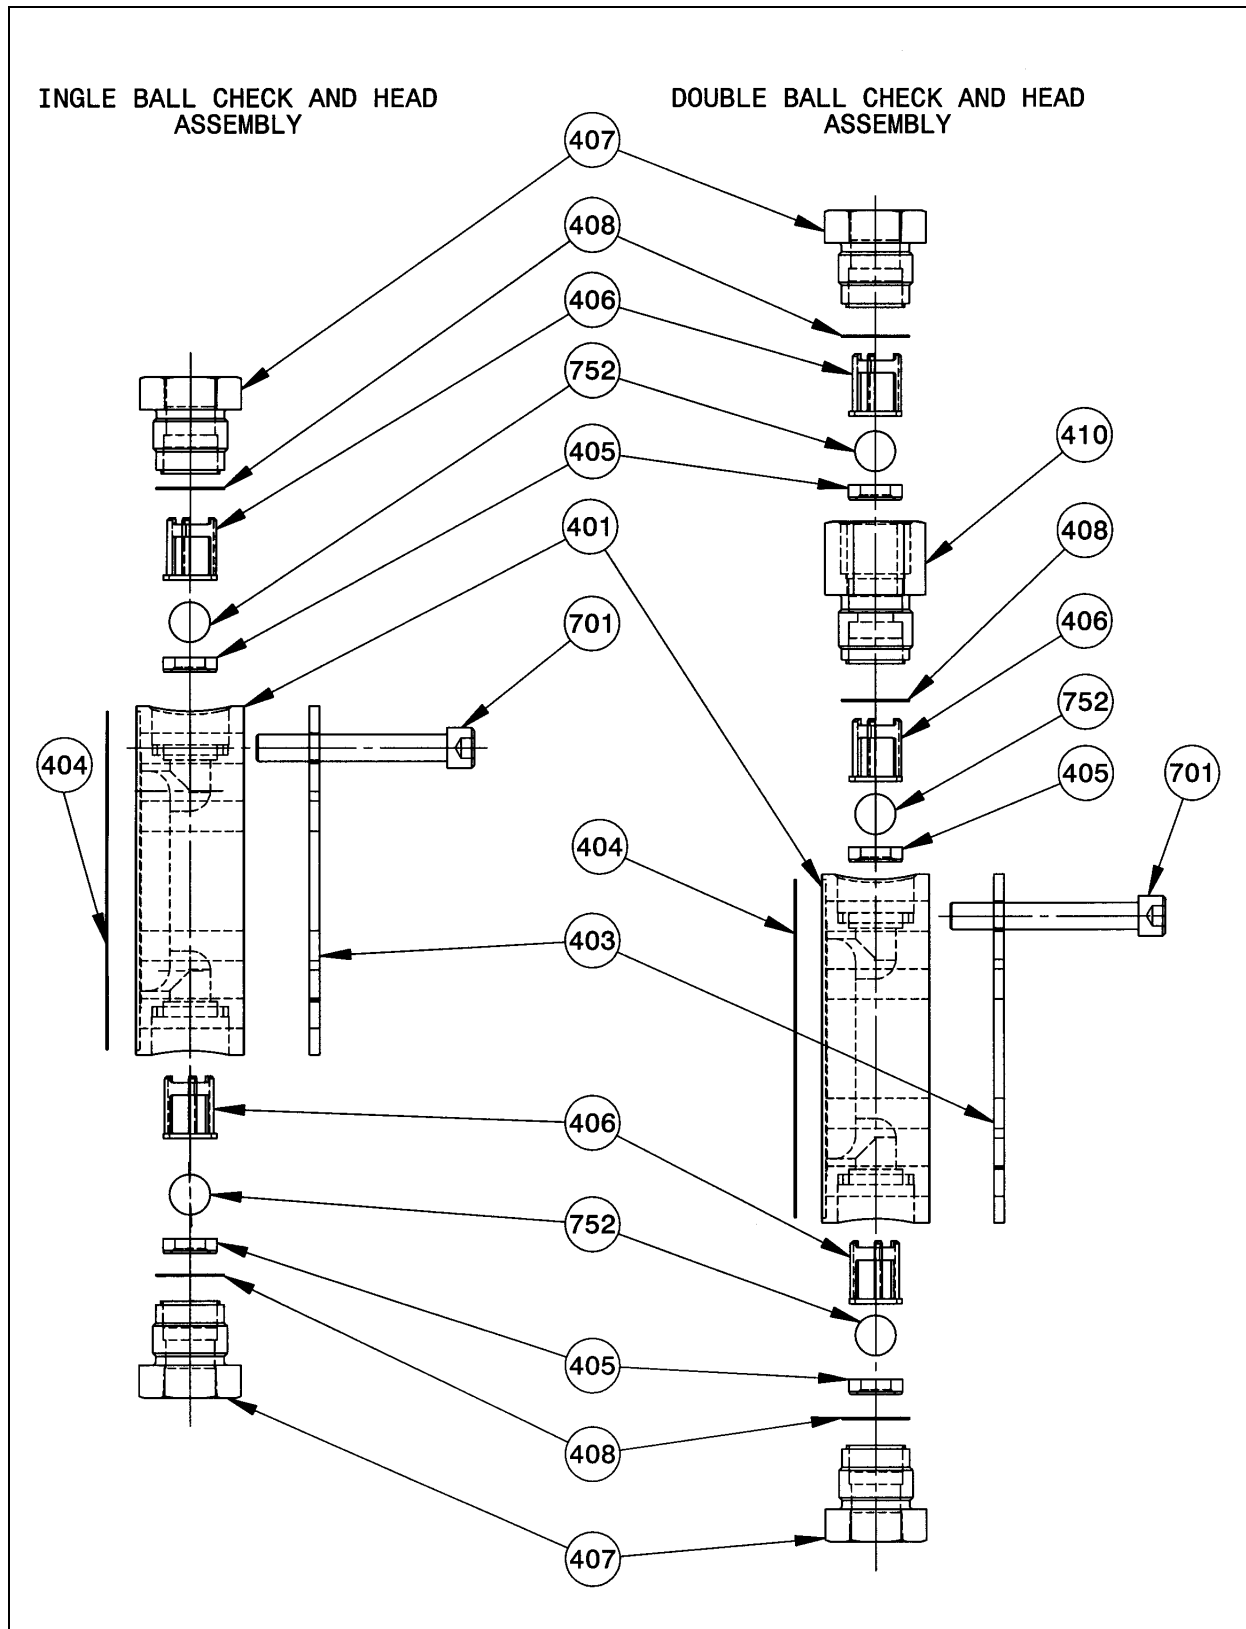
Liquid End Assembly, Size C, Non-Metallic.
